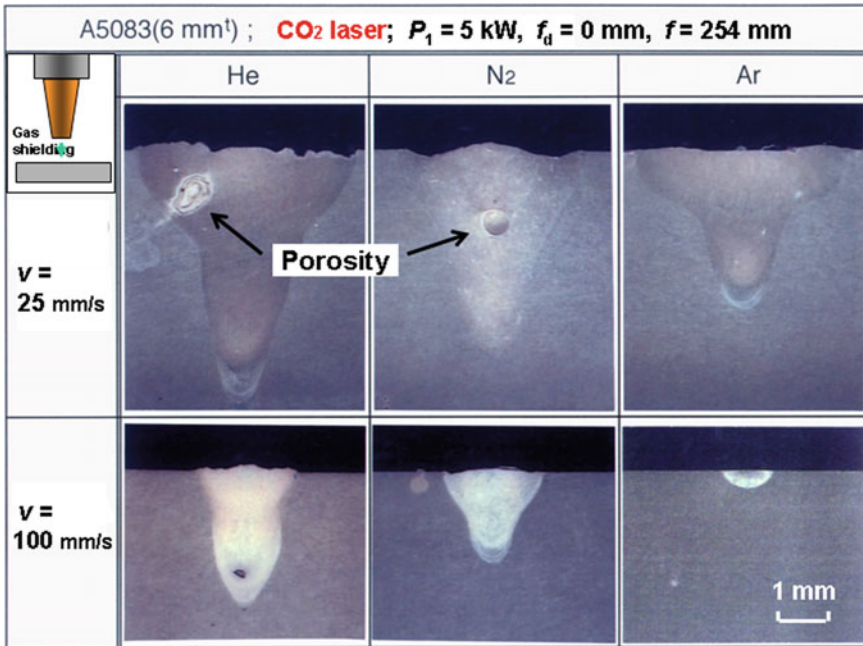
Cross-sectional photos of CO₂ laser weld beads, made at 25 and 100 mm/s in He, N₂, and Ar coaxial shielding gas
